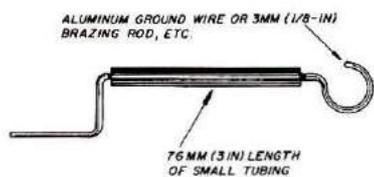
A wire-twister is a handy tool to have around the shop. This one is easily made from a piece of scrap wire and a piece of tubing.
